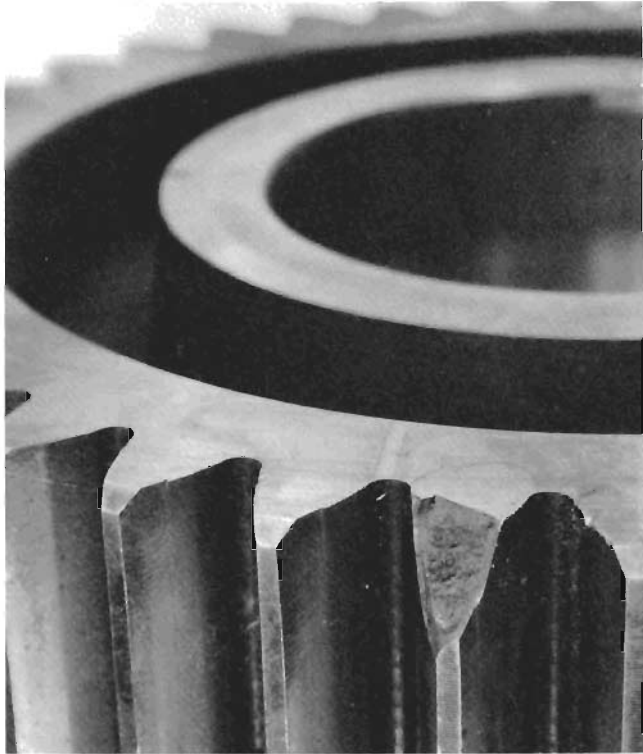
Spur gear damaged by the impact of a dropped gear.
